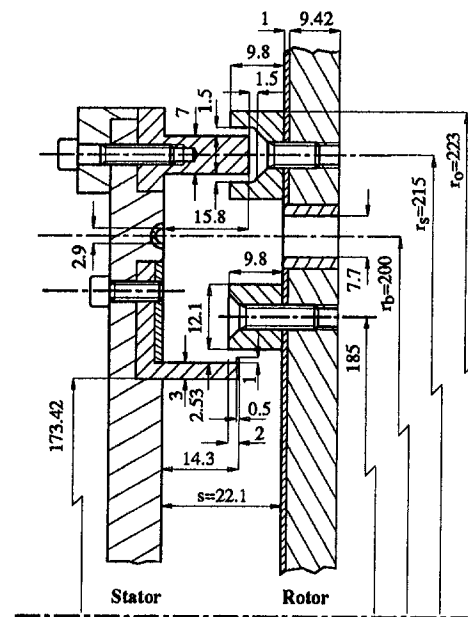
Details of preswirl chamber and seal geometry (dimensions in mm)
